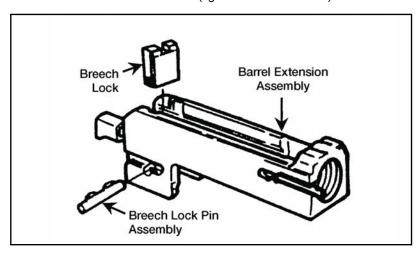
Assembly of the barrel extension assembly
